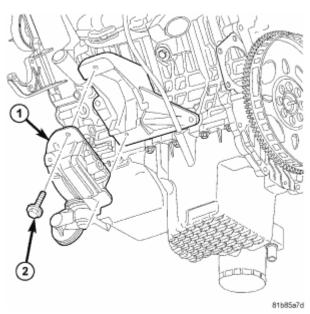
Left Engine Mount Courtesy of CHRYSLER LLC
